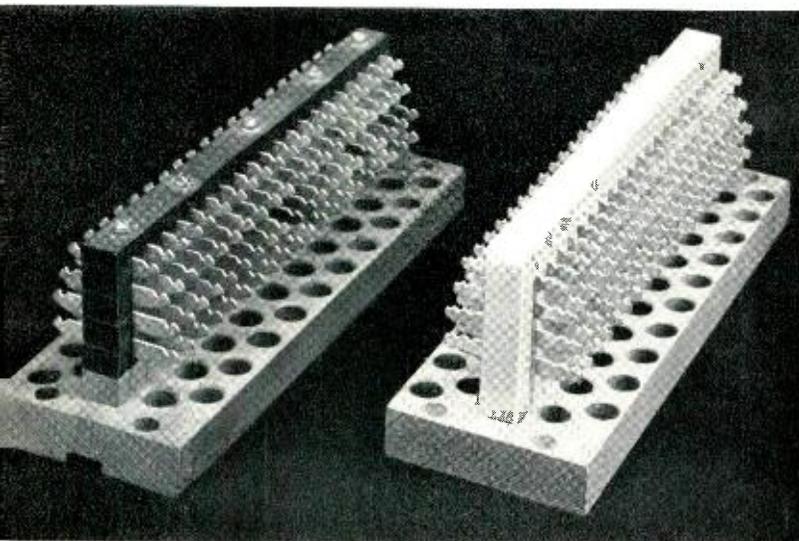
An older terminal strip of laminated construction shown with its cast resin replacement.
